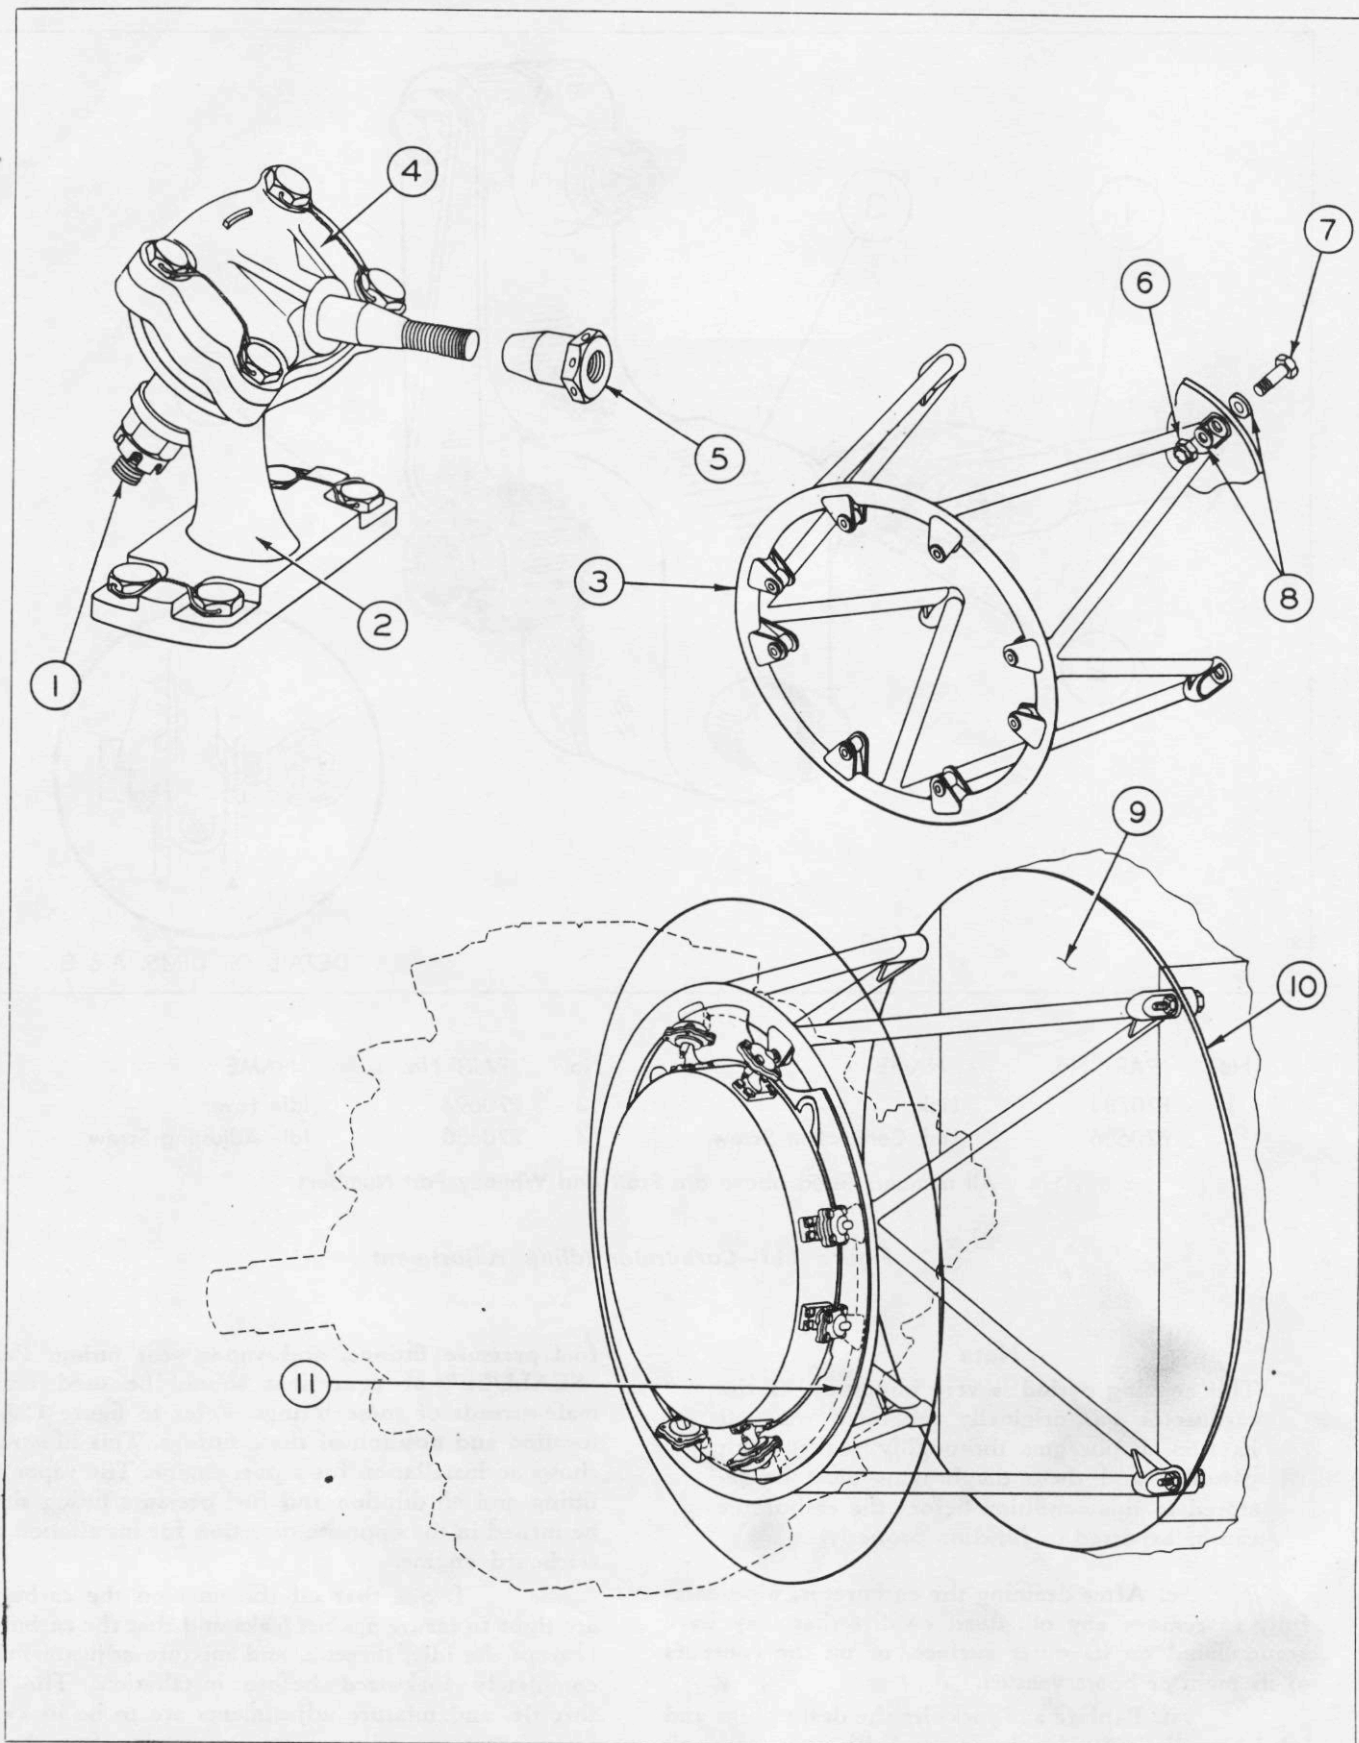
Engine Mount and Flexible Pedestal Mount Fitting
